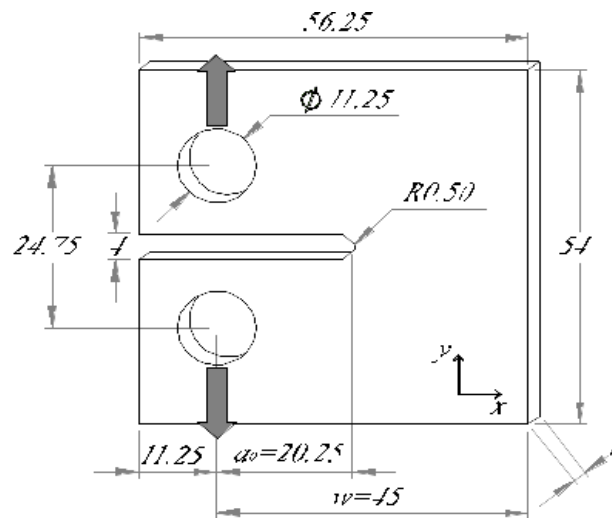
Test specimen dimensions (in mm) for tension translaminal fiber-breaking fracture toughness tests. [6]
